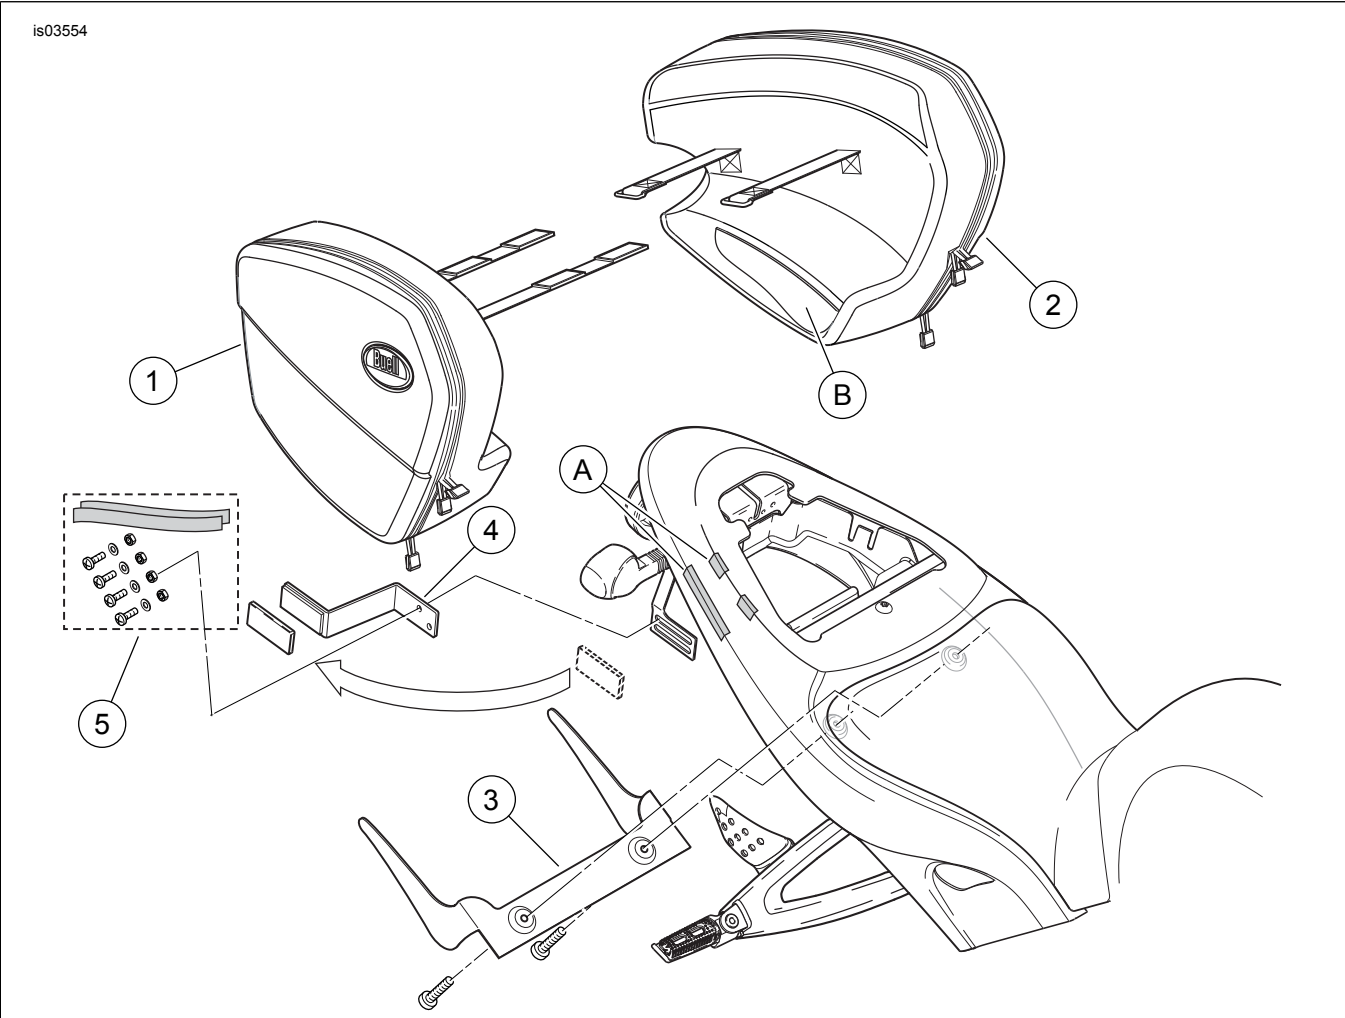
Service Parts: Buell Firebolt XB Removable Saddlebags
